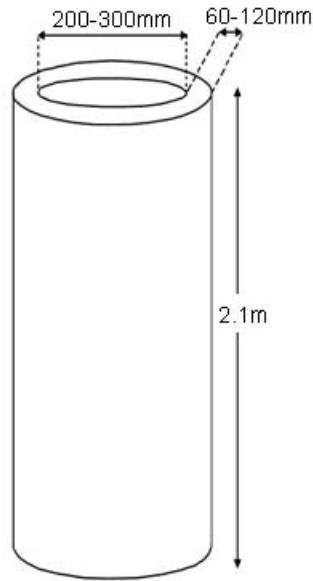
Schematic diagram of the larger section of pipe to show which parts the measurements refer to
